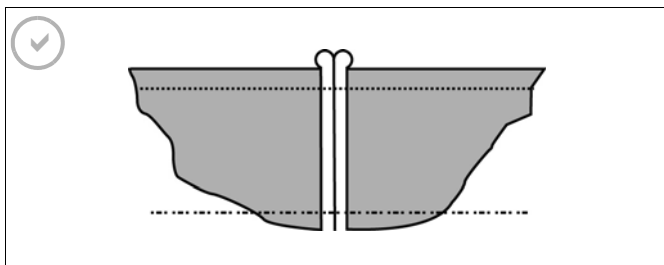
Butt-weld with big welding beads (acceptable)
